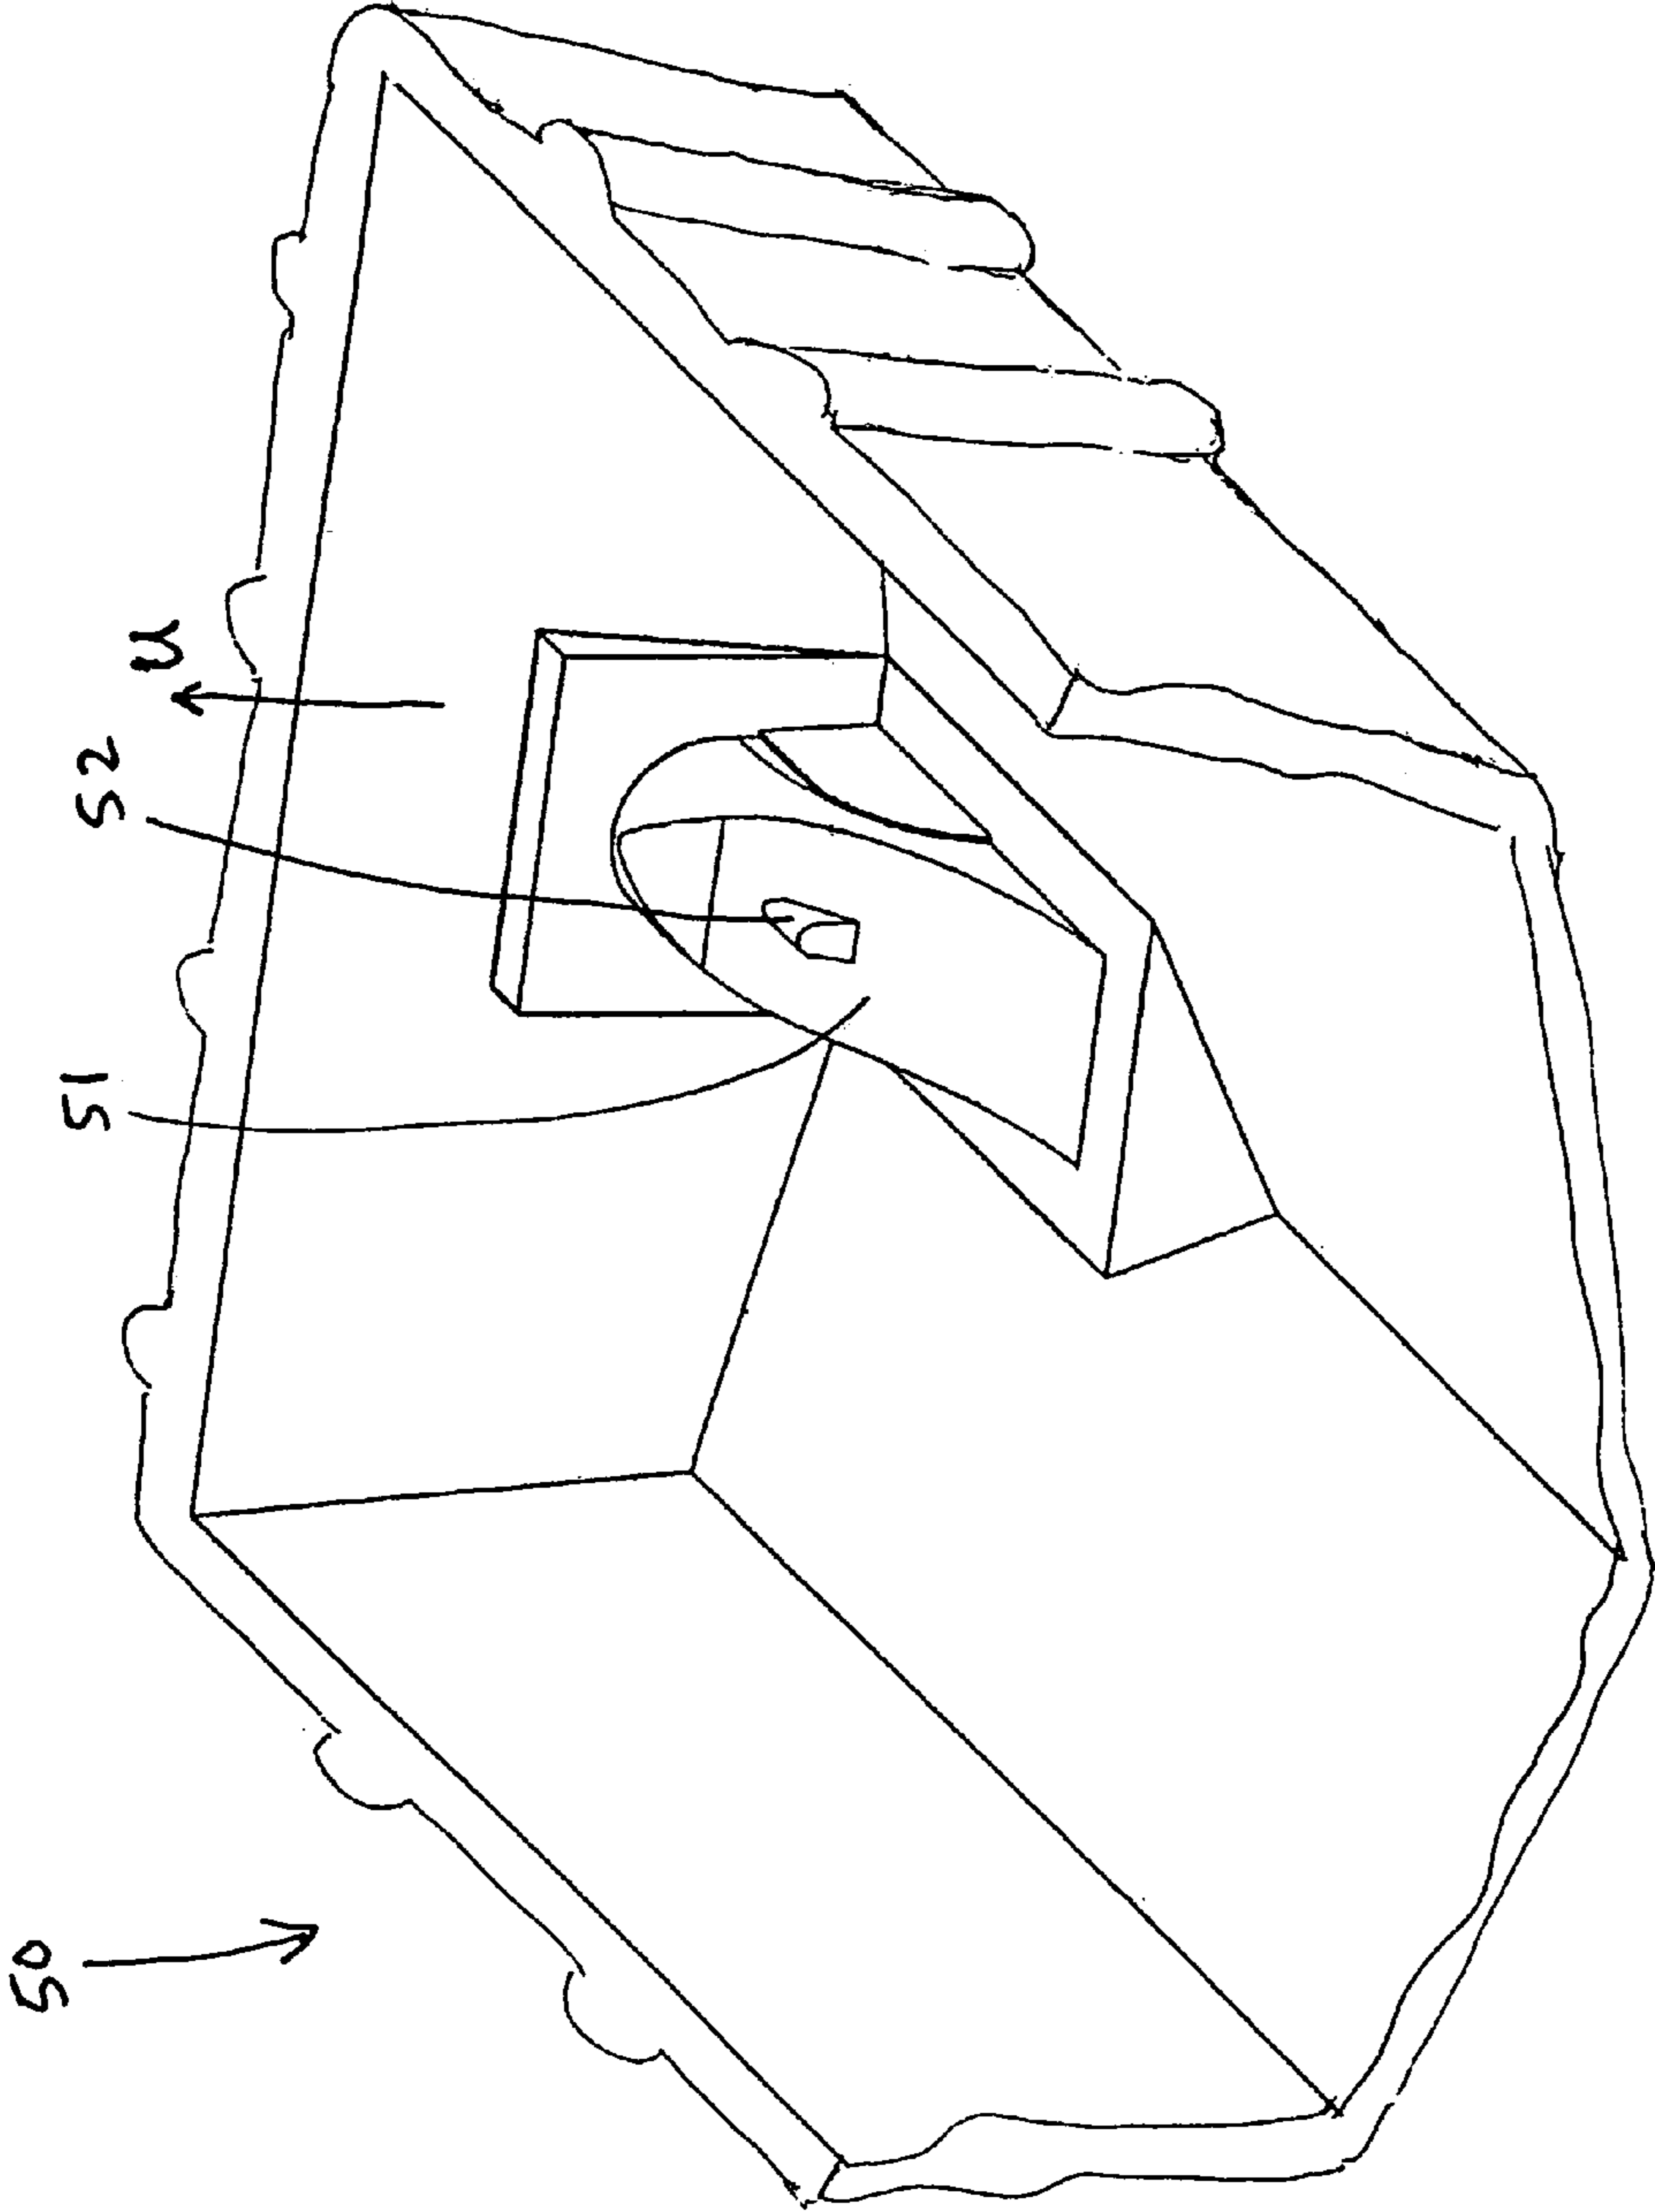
PLUG FOR INTAKE DUCT UPPER PART IN VESSEL MOLD
